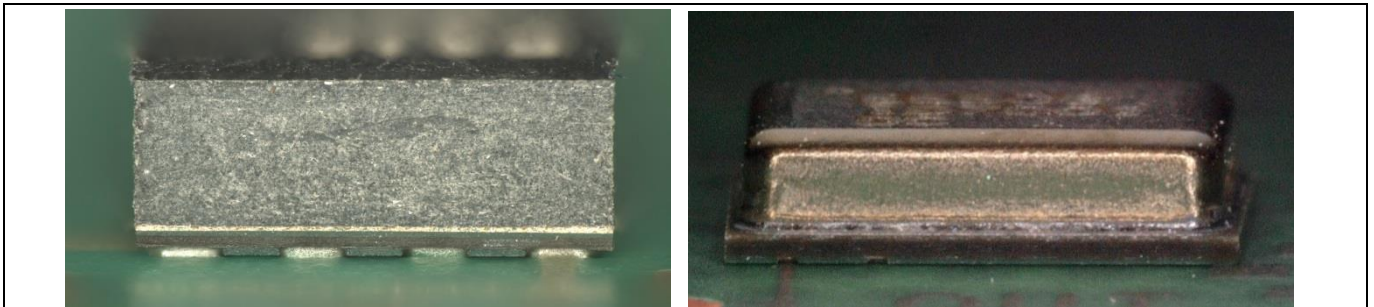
Examples of properly soldered MEMS packages inspected by optical microscope.
